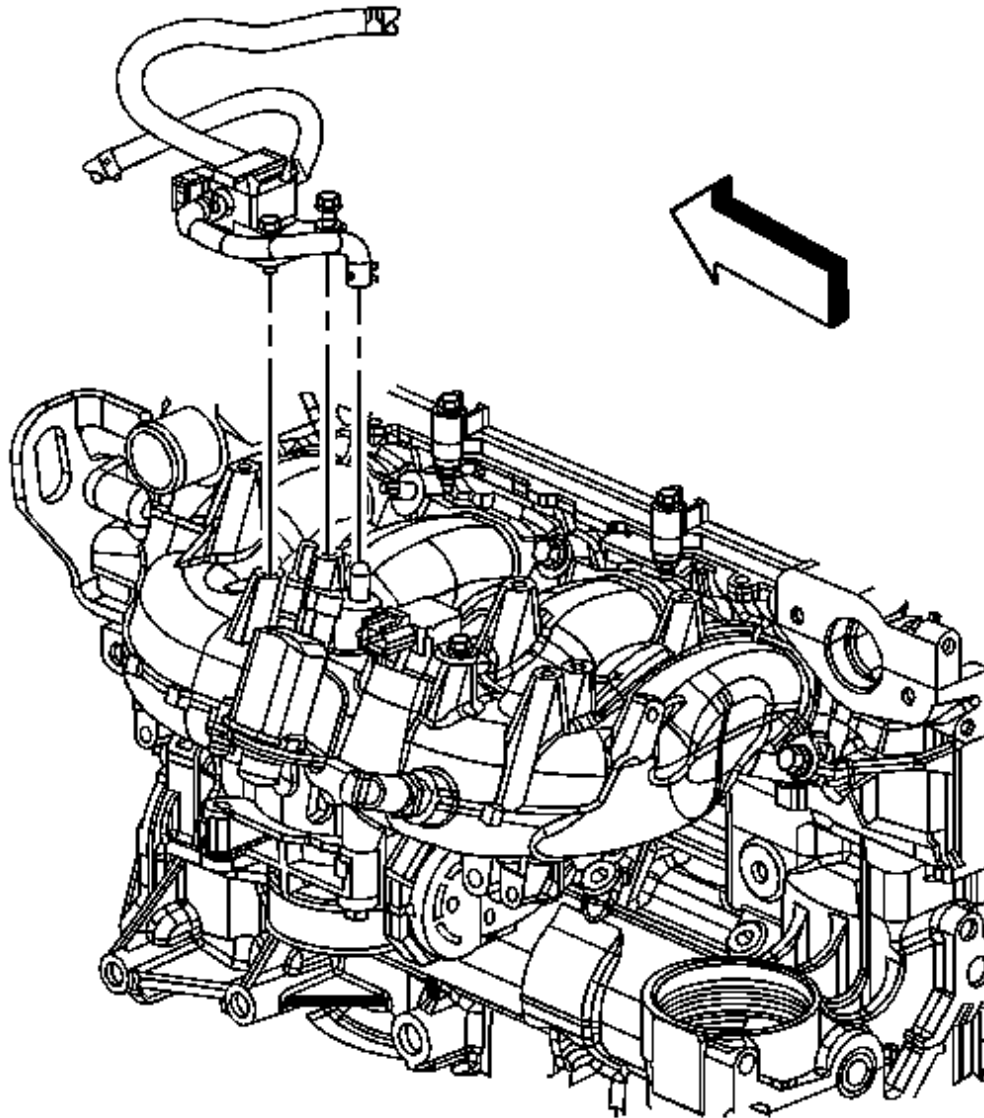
Identifying Charge Air Bypass Valve Solenoid Assembly
